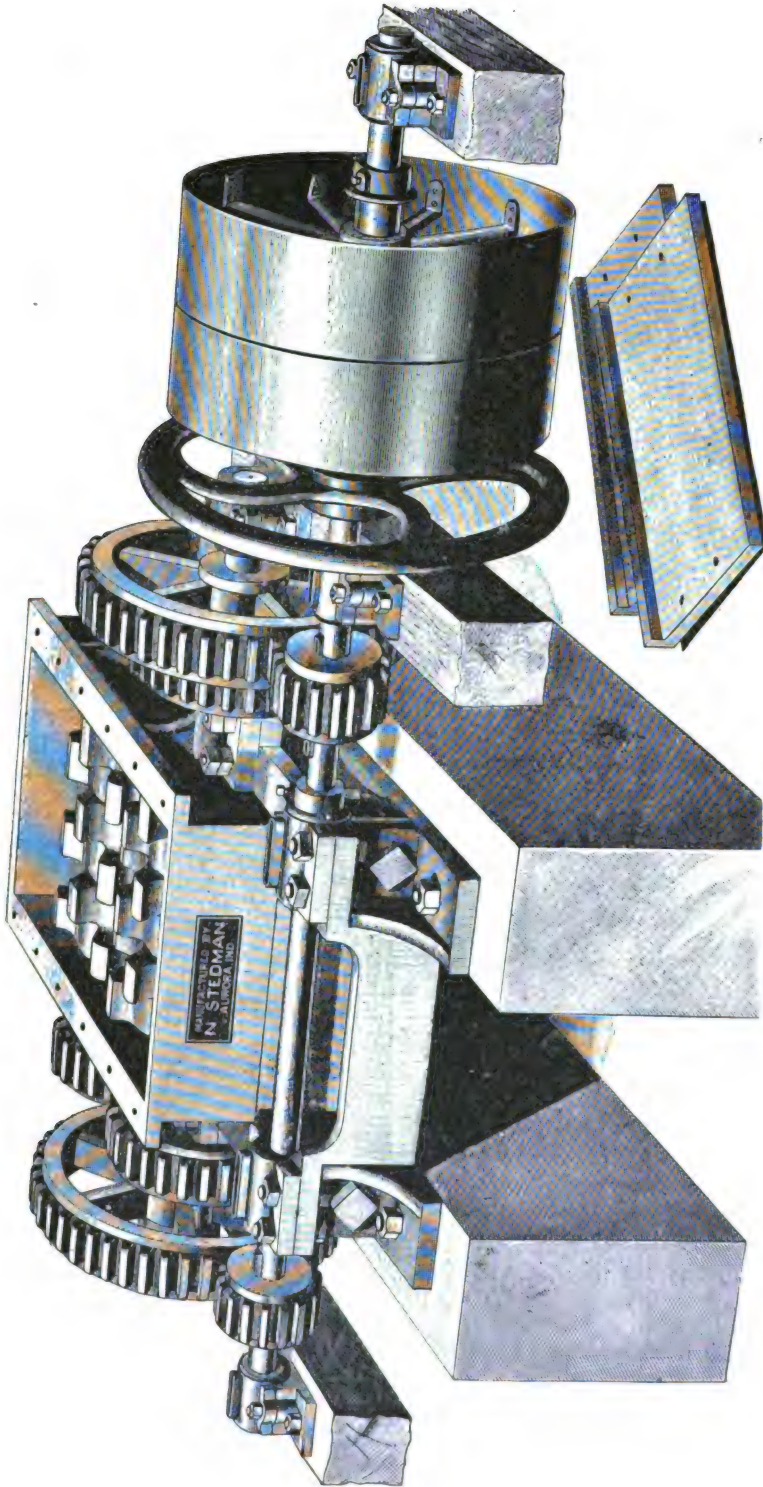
STEDMAN'S DISINTEGRATOR.
